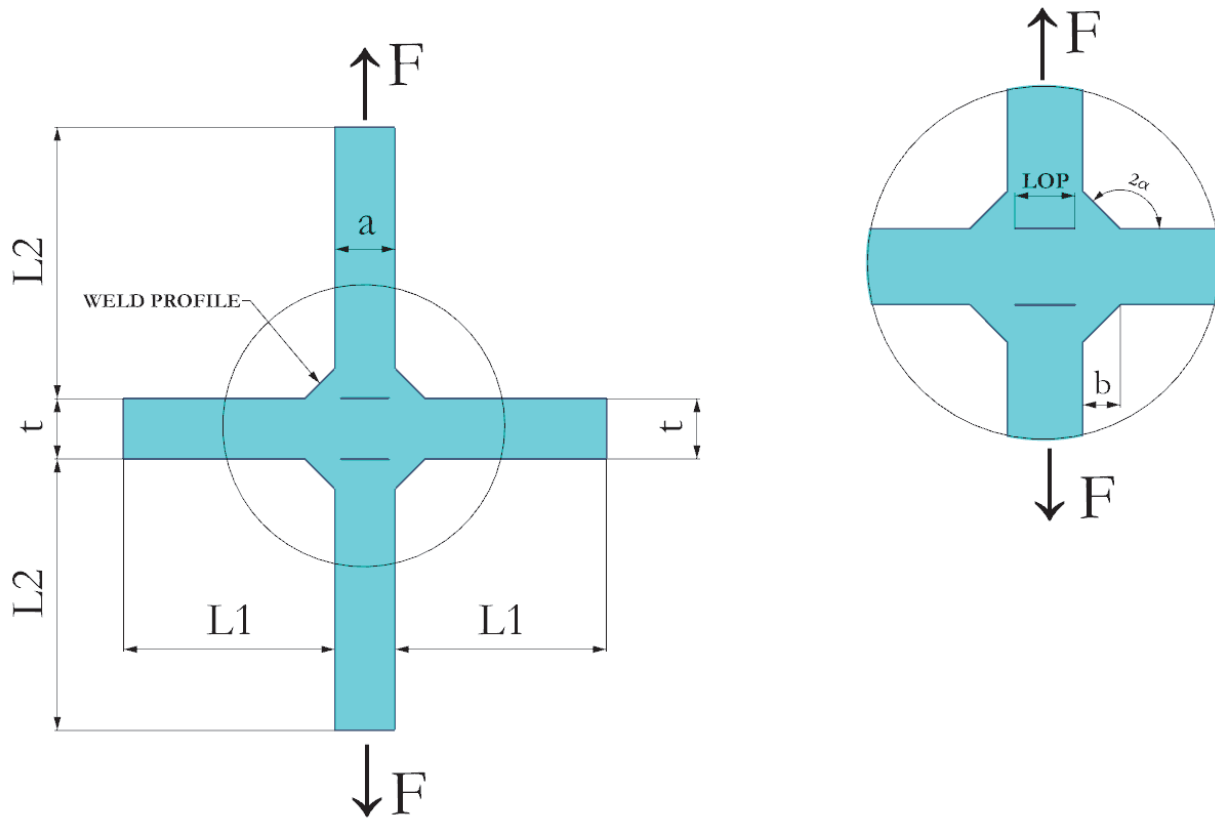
Cruciform-LC joint dimensions and experimental setup.
